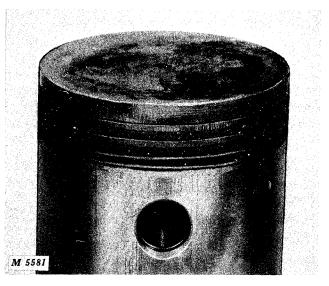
Piston Rings Stuck and Broken Because of Lacquer, Varnish and Carbon Build-Up
